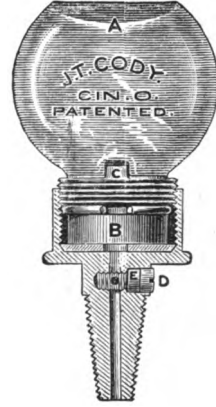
Shaft Oiler. Fig. 534. Shaft Oiler, with Loose Wire and Wood Plug. Sectional of Fig. 533.
